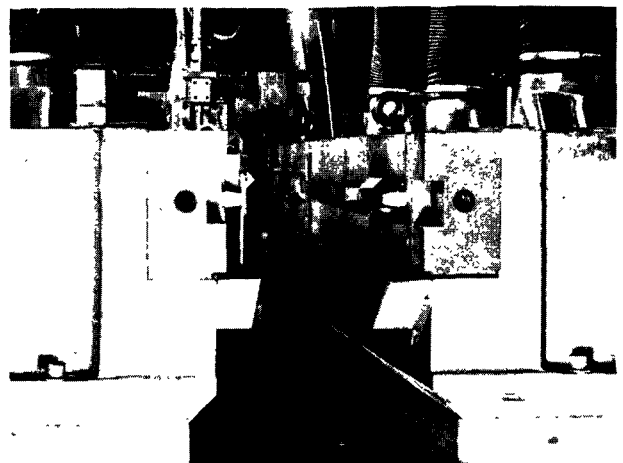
Tile broaching machine (Courtesy of Fairey Engineering Limited)
